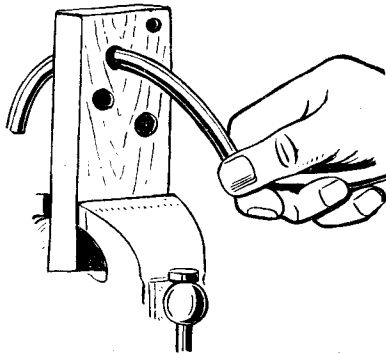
A piece of wood drilled with various sized holes will assist in making the bends
